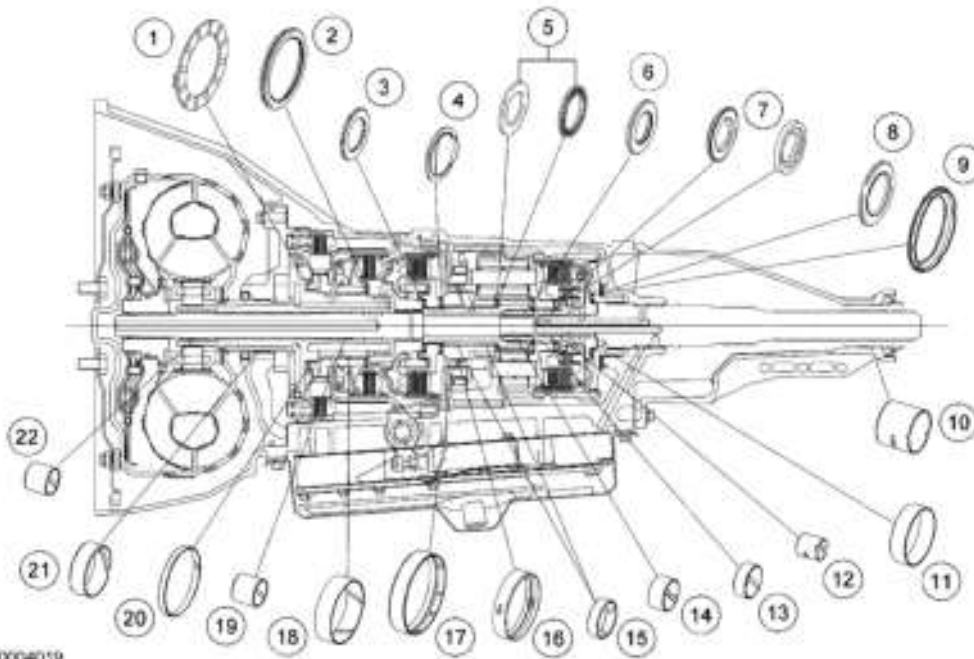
Exploded View Of Automatic Transmission (5 Of 6)
